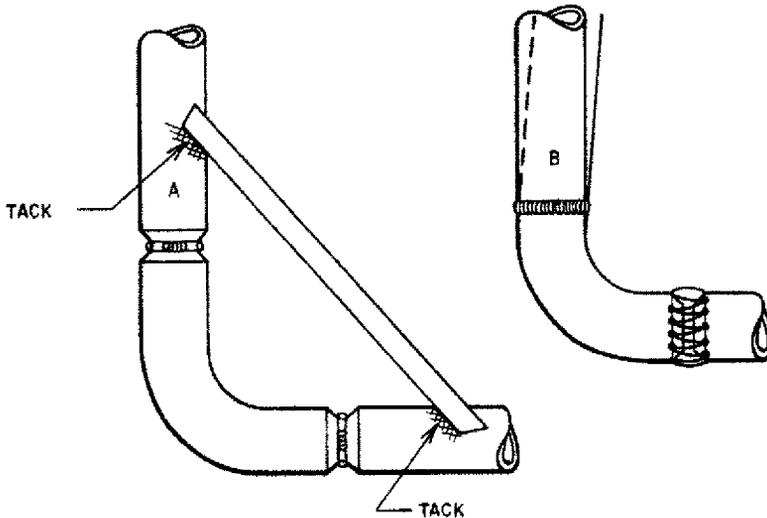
A. Using a support to maintain the correct alignment of a right-angle pipe joint; B. Distortion of a right-angle pipe joint caused by welding.
